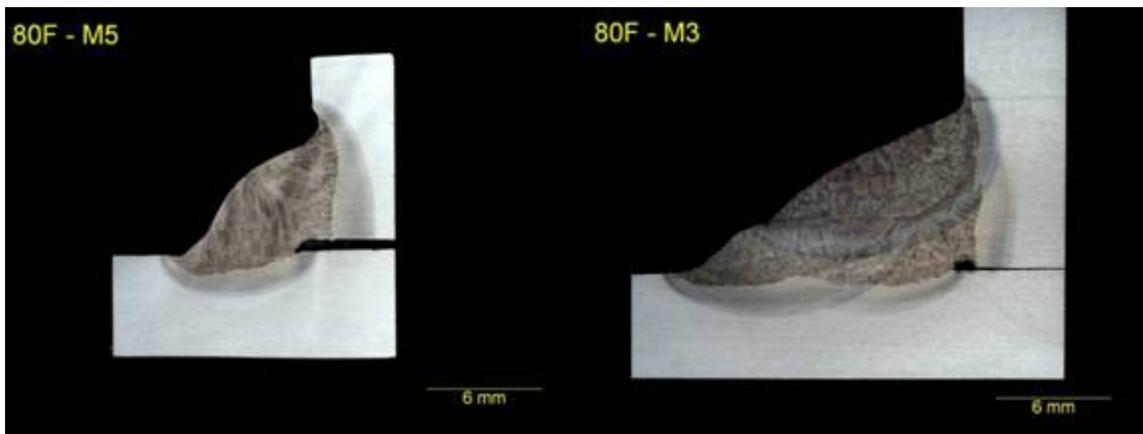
Macros of FCAW Welds on X80 Pipeline Material
